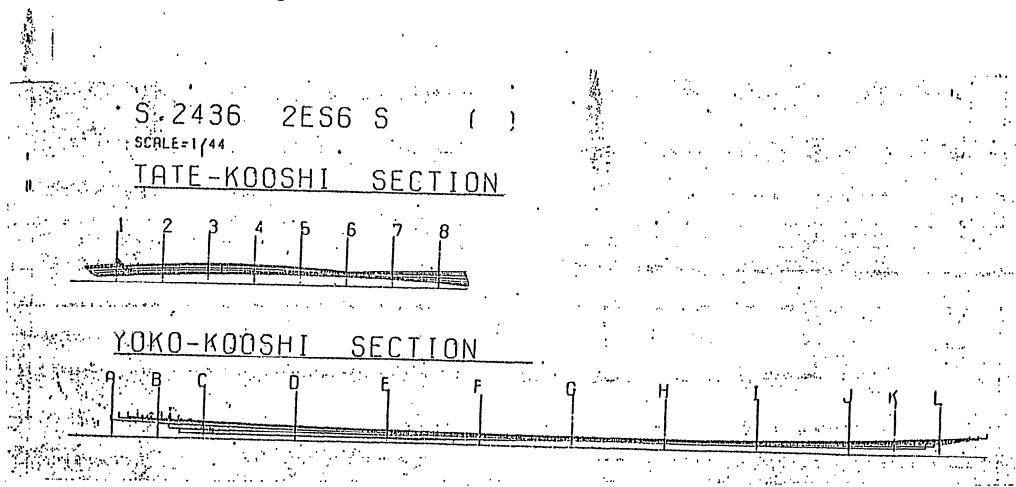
DIMENSION PLAN OF SHELL PLATE
